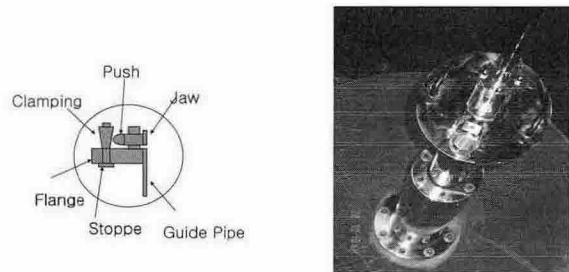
Detail of the clamping device and the capsule assembly machine mockup.
